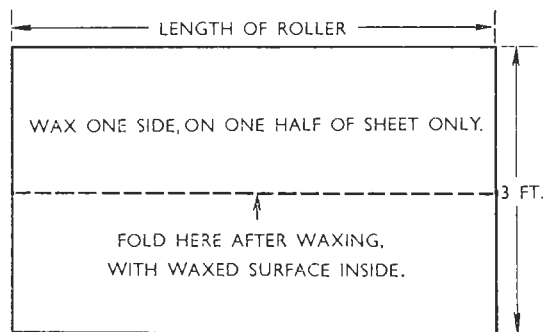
Method of waxing a sheet for cleaning the machine bed.
